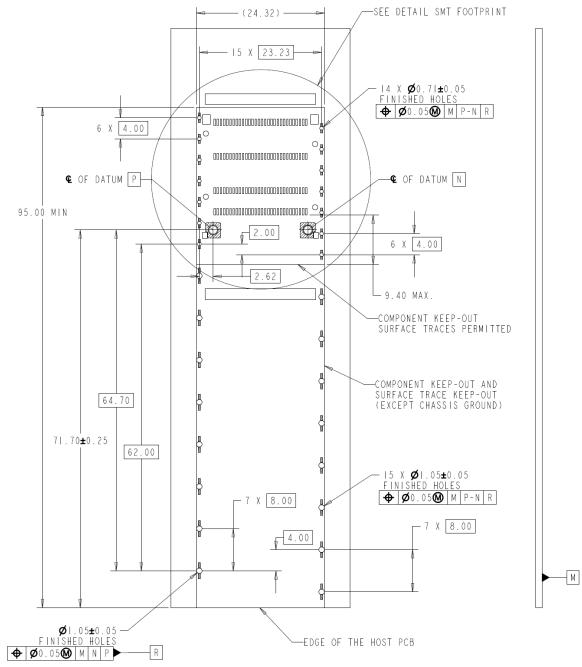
Host PCB Layout for 2x1 SMT cage
